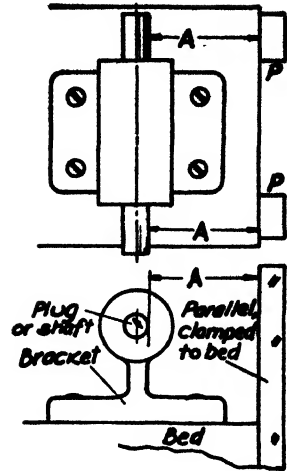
Checking Alignment of Shaft Hole in Bracket with Finished Edge of Machine Bed.
